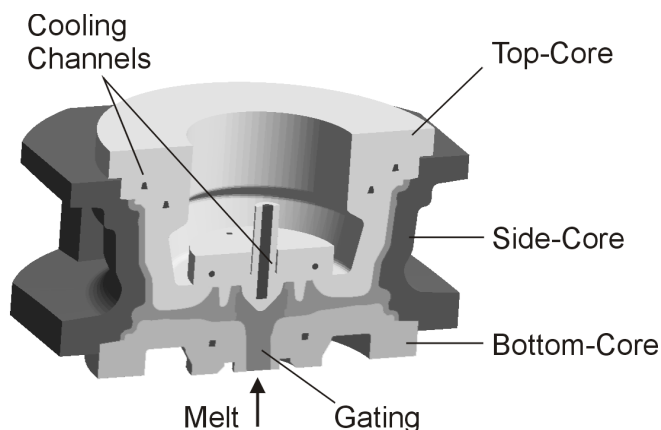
Geometry of the casting system which is enmeshed using control volumes for the simulation of die filling, solidification and microstructure formation within the casting. Mold and casting are displayed in cross-section.
